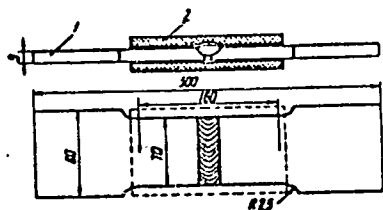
Welded joint with an enlarged sectional view.
